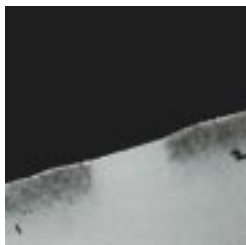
Cut-away view of laser marked surface (22x) showing charring to 10 mil depth.
